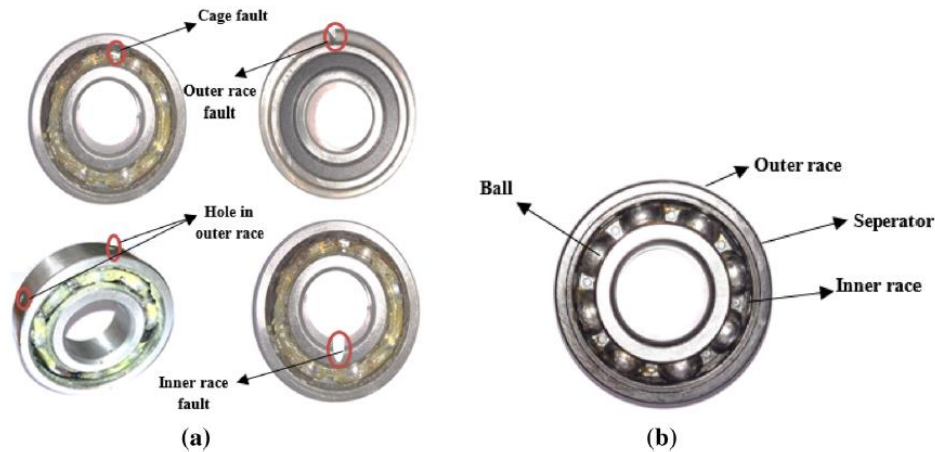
Structure of ball bearing. (a) bearing defects and (b) healthy
